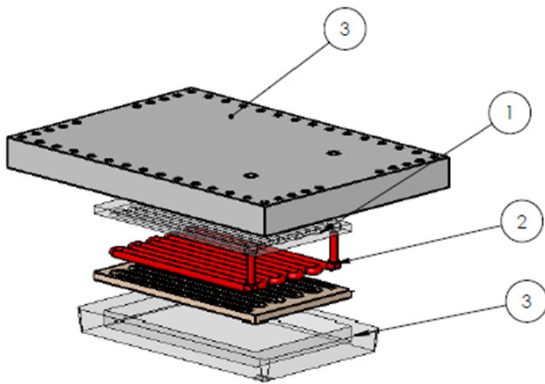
Heat system assembly on the mold: (1) aluminum plates, (2) resistance and (3) mold parts.
